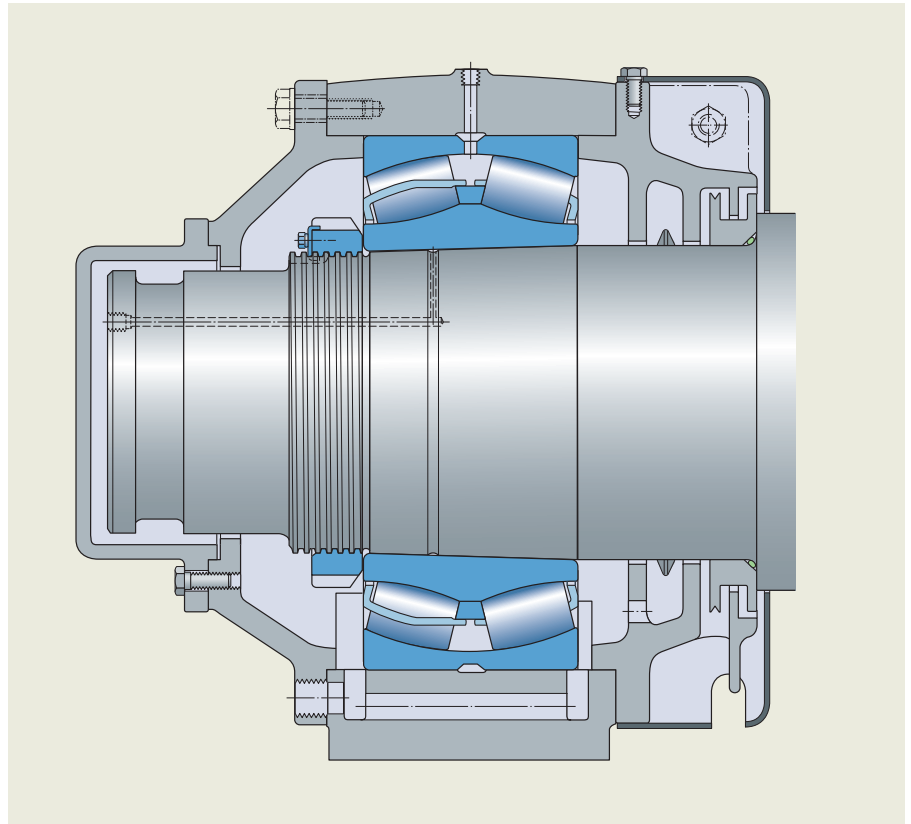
Spherical roller bearing, 232 series, mounted on a solid press roll.
